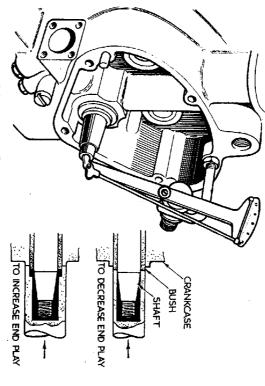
METHOD OF CHECKING AMOUNT OF MOVEMENT BETWEEN FLYWHEELS AND CRANKCASE.
